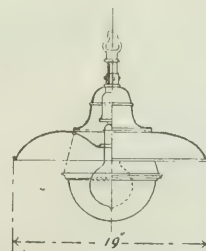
PART SECTIONAL DRAWING OF G.E.C. FITTING.
